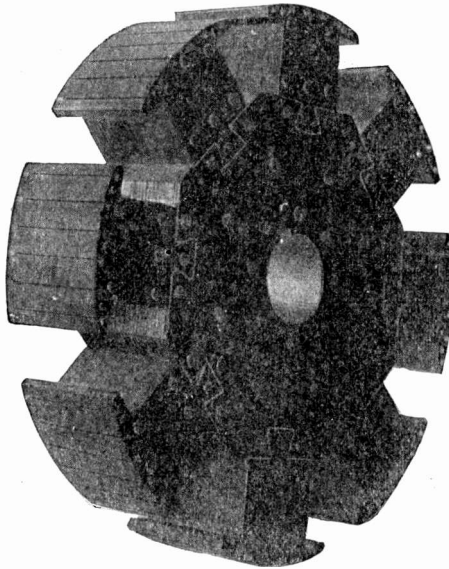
Rotor Core with Pole Pieces Assembled on Spider
